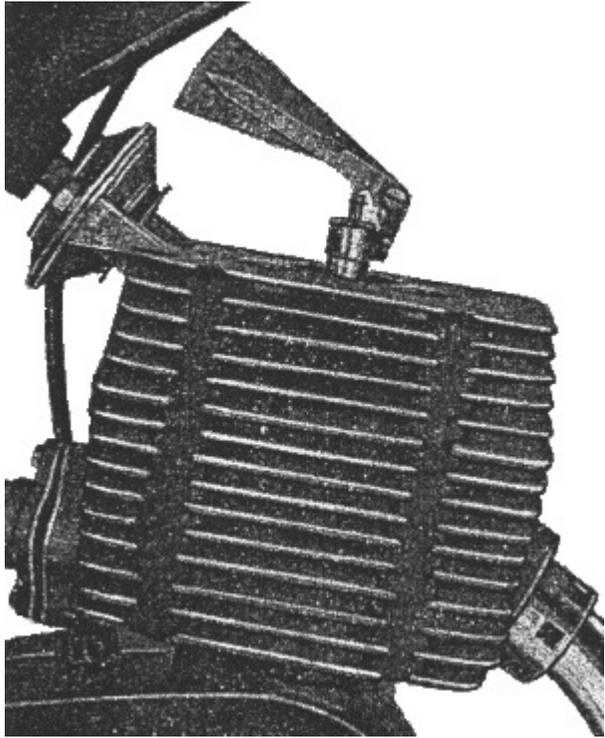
Ignition setting gauge 29-50.801 screwed in place
